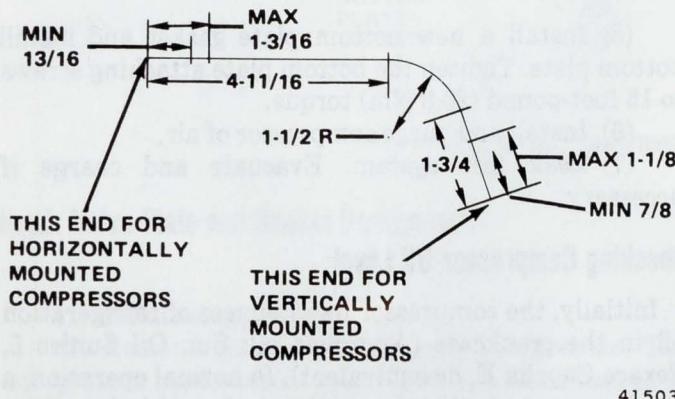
E-15 Oil Dipstick Fabrication Dimensions (inches)
